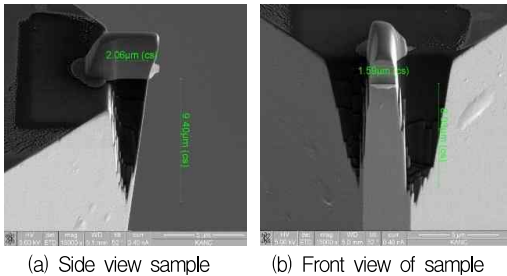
SEM images of 1.59 μm cutting edge width tool by the focused ion beam machined (beam current: 13 nA, voltage: 30 kV); (a) side view of sample (b) front view of sample
